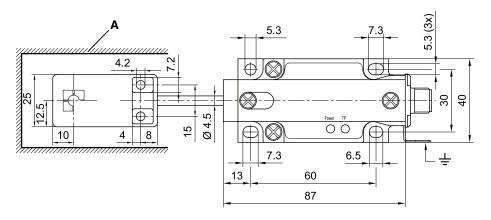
Processor BIS L-409-045-004-07-S4 (dimensions in mm)
